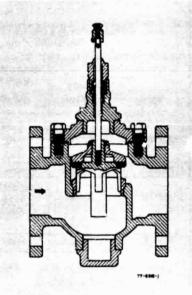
FLANGED, CAST IRON, DIRECT ACTING, 125 PSI (1035 kPa) VALVE BODY 2-1/2 THRU 6 IN. (THE 250 PSI [1725 kPa] VALVES HAVE RAISED FACE RING)
